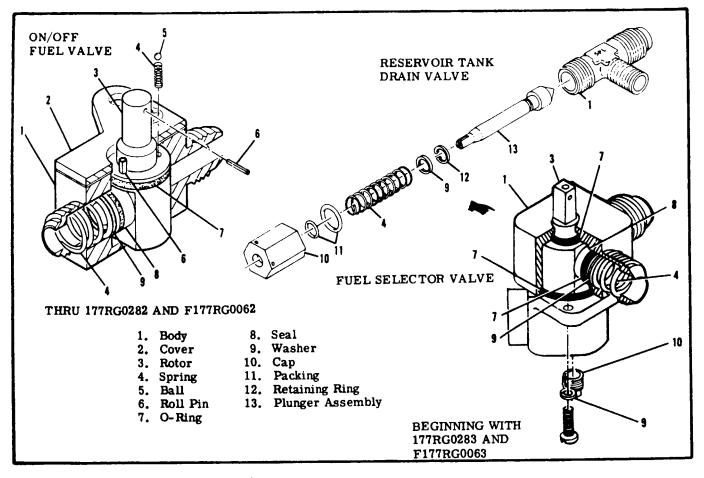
Selector Valves and Reservoir Tank Drain Valve
